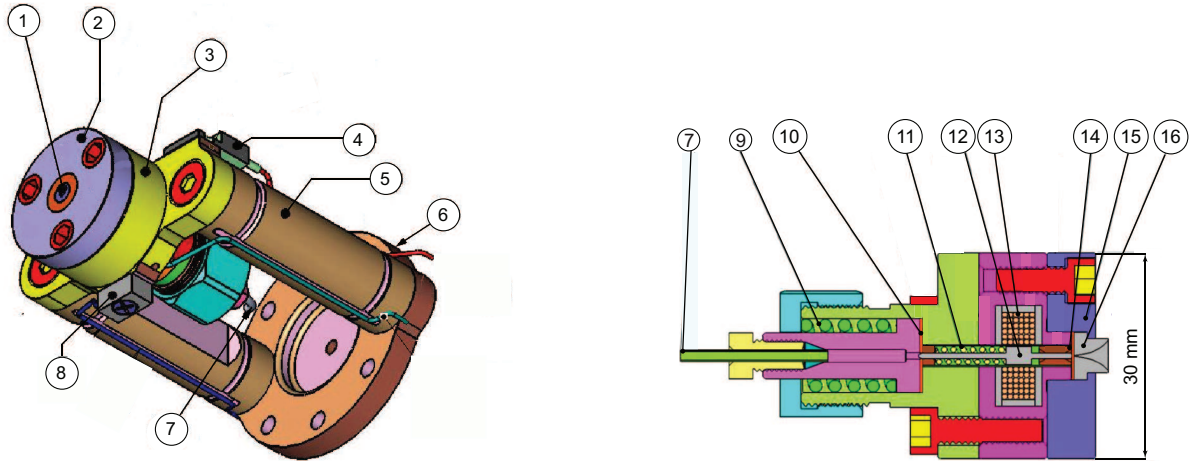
Components of the Even-Lavie valve [180]: (1) orifice, (2) nozzle front flange, (3) valve body (copper), (4) HPR heater, (5) Cu columns, (6) base flange to mount on cold finger, (7) tube gas inlet ( $\frac{1}{16}$ "), (8) diode sensor clamp, (9) tightening spring and pressure relief valve, (10) Kapton foil gasket, (11) return spring, (12) reciprocating plunger (magnetic stainless steel alloy), (13) Kapton-insulated Cu coil, (14) Kapton foil gasket, (15) front flange and valve body, (16) conical nozzle (stainless steel).
